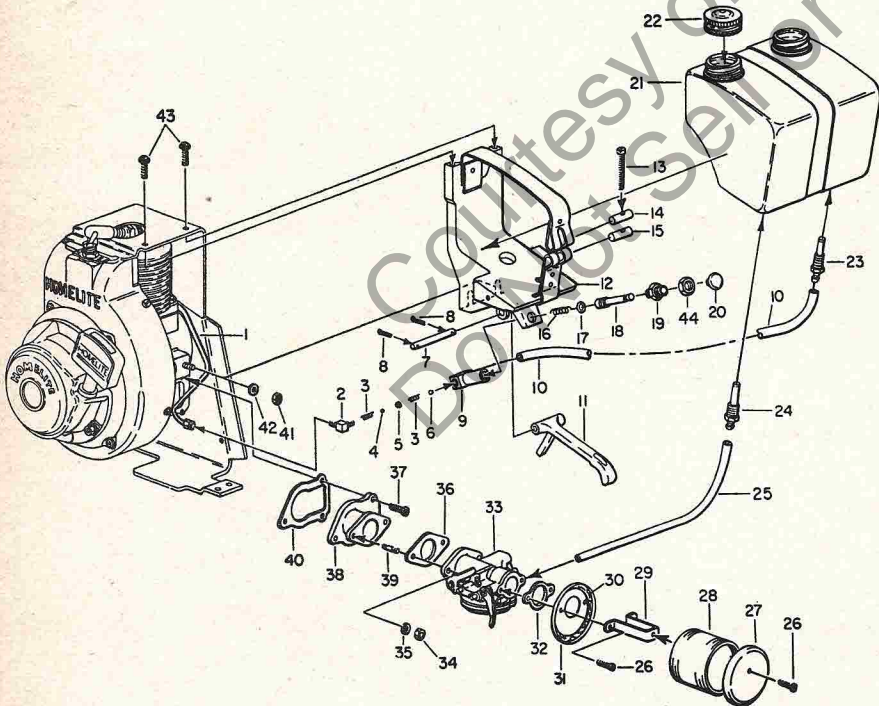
C—Exploded view of fuel system and oiler used on economy models.
